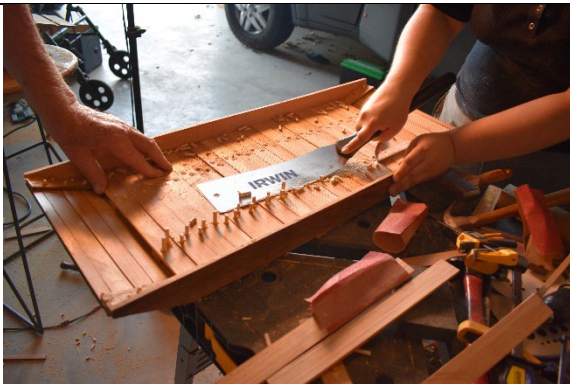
Saldivar and Newell trimming excess treenails from interior planking (Photo by Michaela Hoots).
